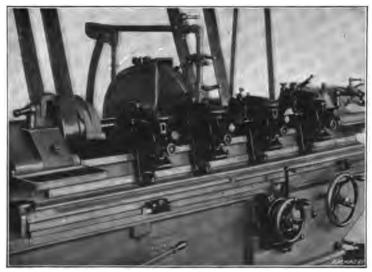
Grinding Machine equipped with Four Universal Back-rests
